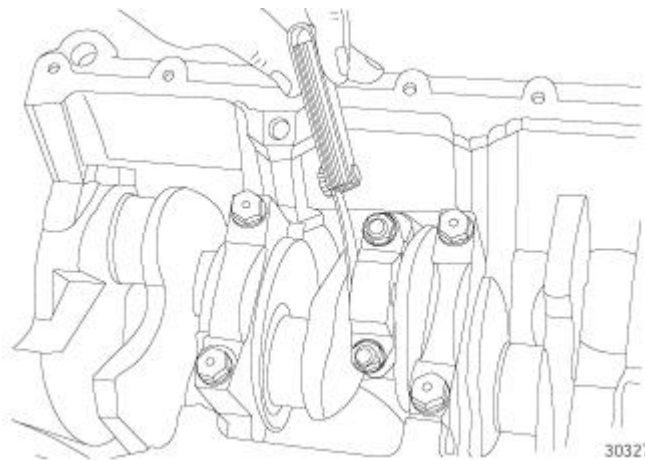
Checking Connecting Rod Side Clearance - Typical
